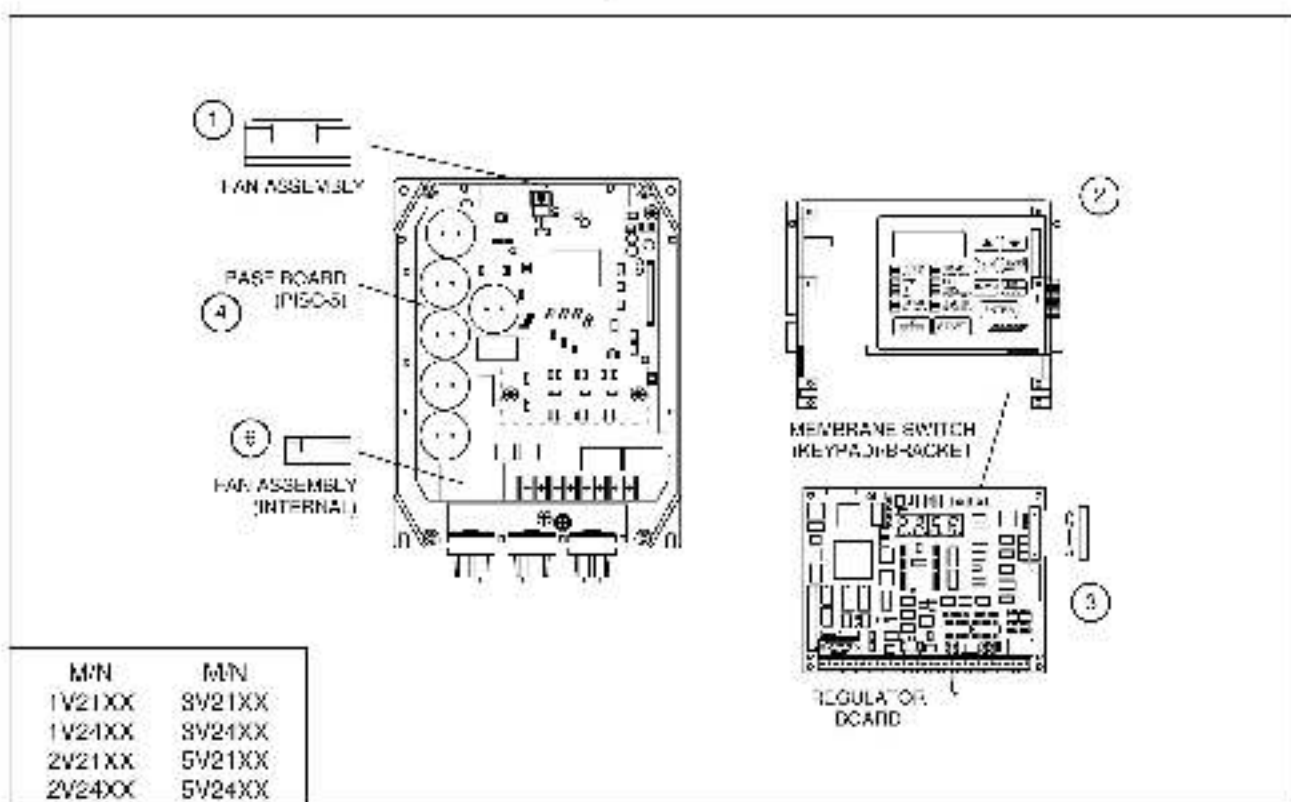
1 to 5 HP Drive Components and Locations
